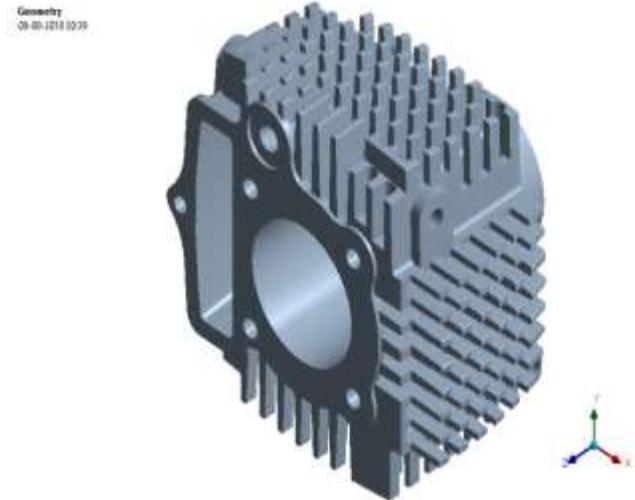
CAD geometry of proposed design-1 of engine cylinder block
